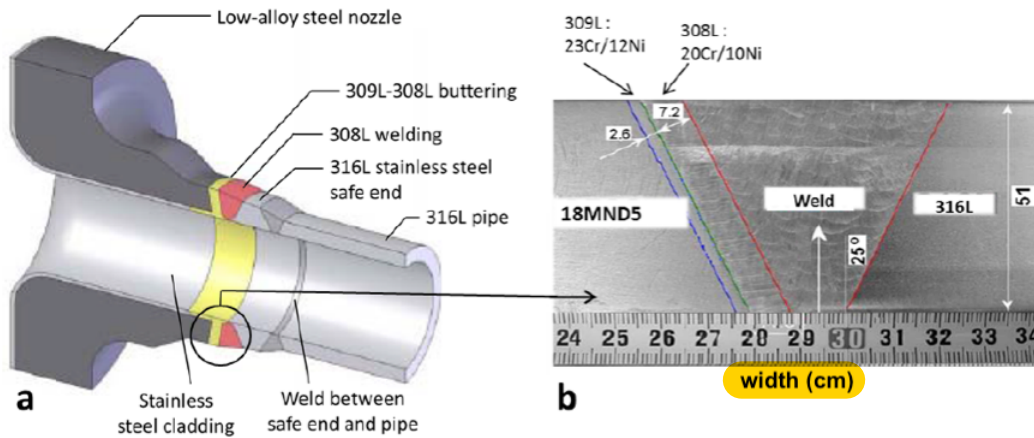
(a) Schematic of a connection between a low-alloy steel component and a stainless steel pipe; (b) Geometry and constituents of a dissimilar steel weld [1]
